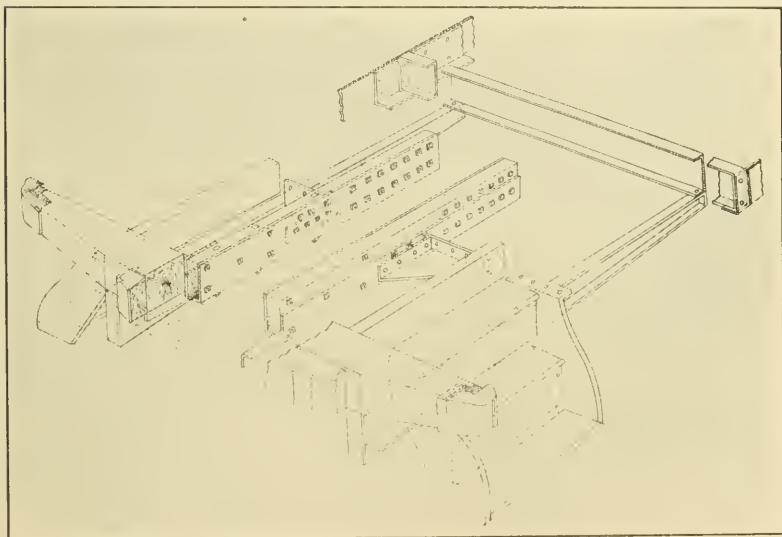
SKELETON OF PLATFORM MEMBERS, STEEL AND WOOD CONSTRUCTION
